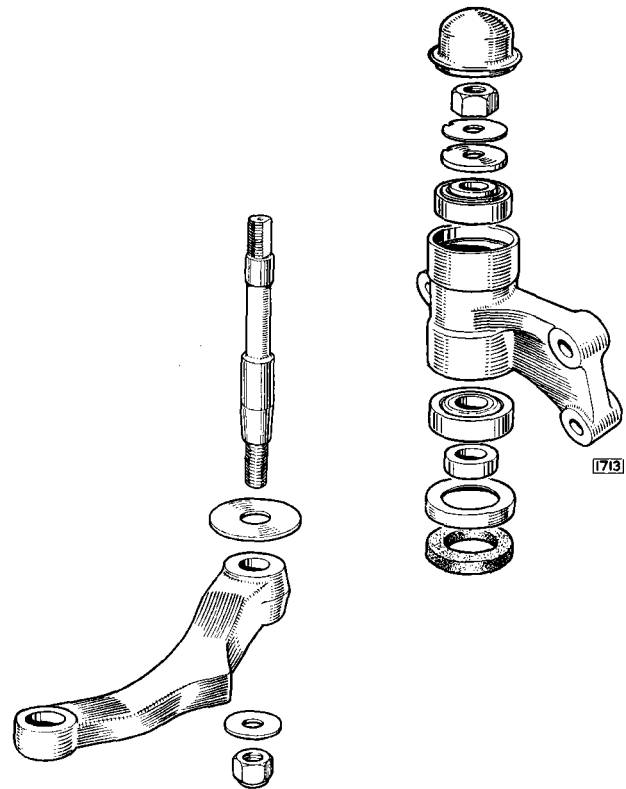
Exploded view of the power-assisted steering idler lever assembly.
